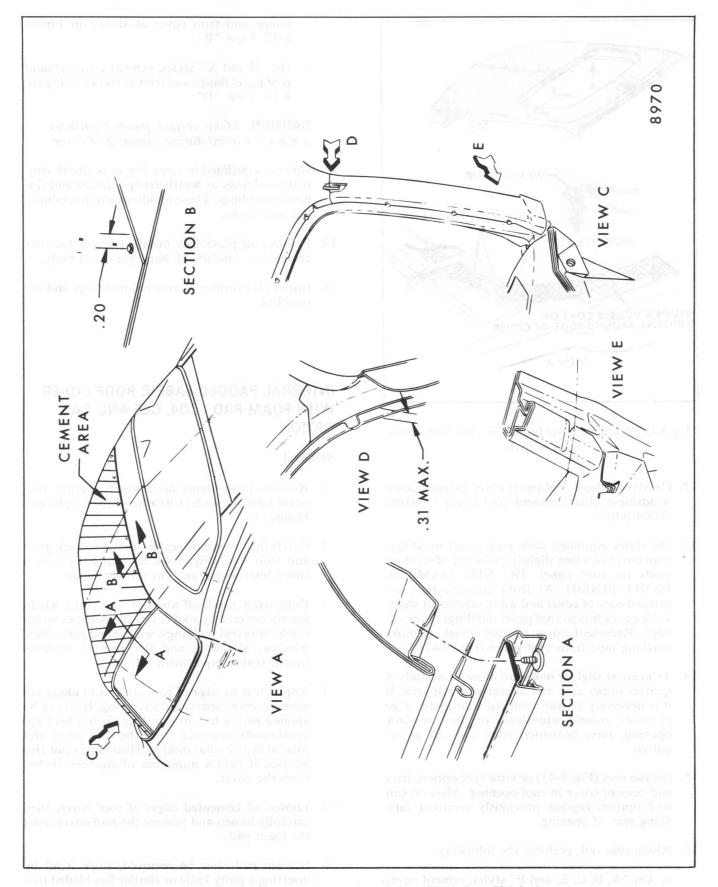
Typical Fabric Roof Cover Installation - "F" Styles - CB7 Option
